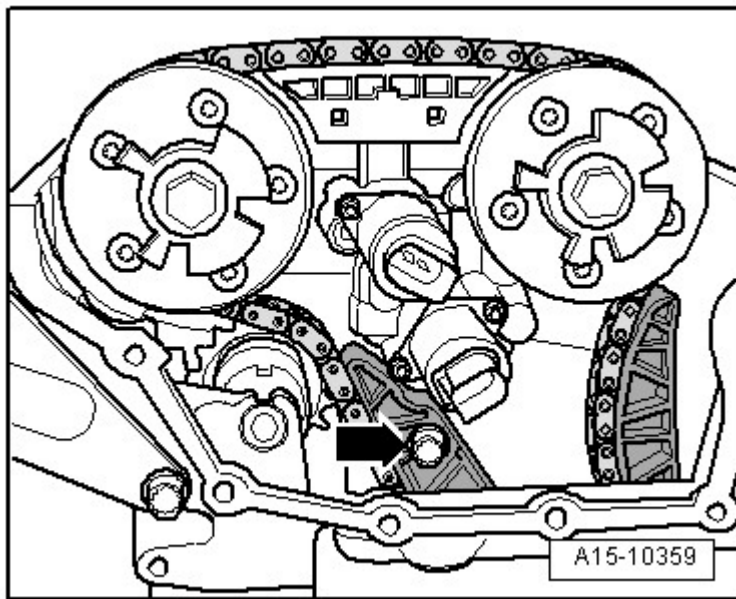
Identifying Guide Rail Bolt -Arrow-
